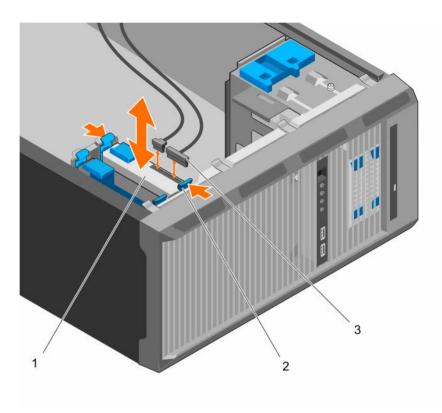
Removing and installing hard drive carrier from the hard drive bay
